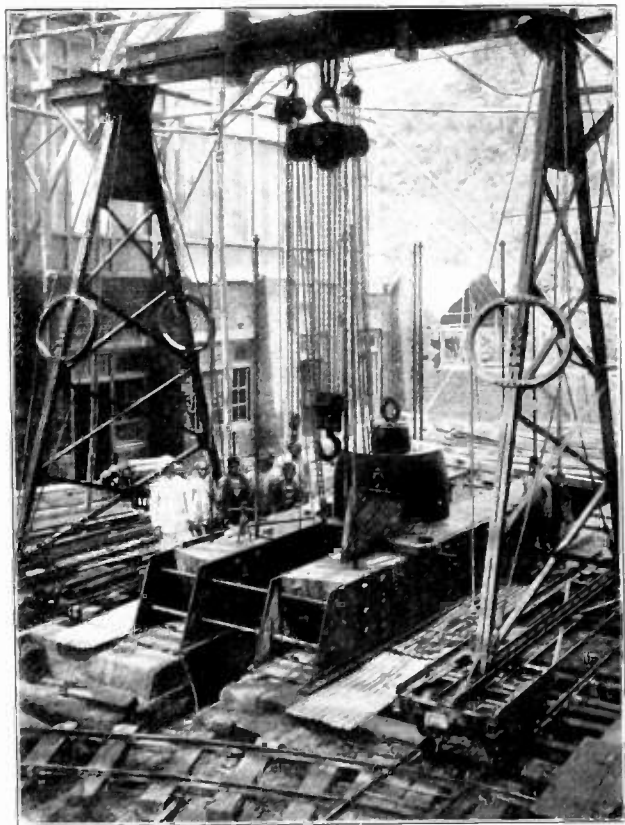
Method of Assembling Magnet Core. Lower Core Complete Except Conical Tip and Base.
